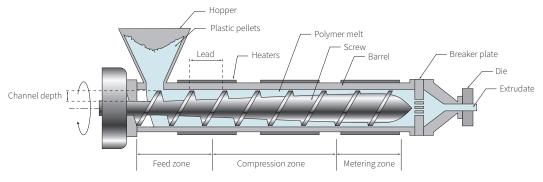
Layout of a typical extrusion machine and the most important dimensions.
